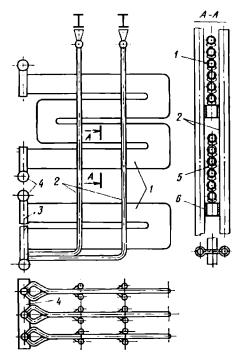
Horizontal platen superheater mounted on cooled suspended tubes 1—horizontal platens; 2—suspended cooled tubes; 3—headers; 4—collecting boxes; 5—spacers; 6—support strip of platen bank
